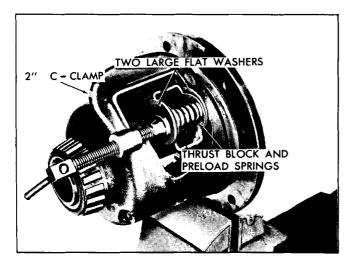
B-10 Compressing Pre-load Springs - B Series - "O"
